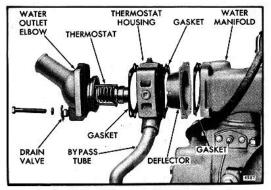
Typical thermostat Housing Mounting (Radiator Cooling System)
